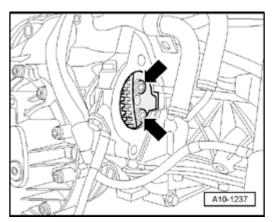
Using Socket T40058 To Rotate Crankshaft To TDC Courtesy of VOLKSWAGEN UNITED STATES, INC.
